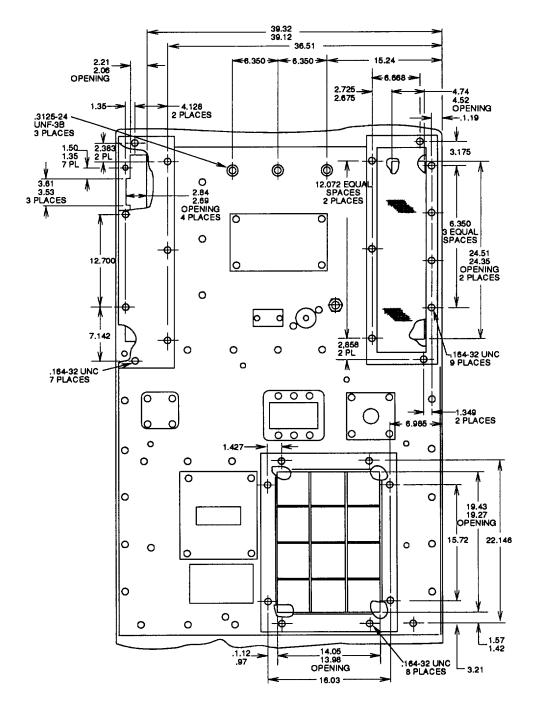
Installation Dimensions (Sheet 6 of 6)
